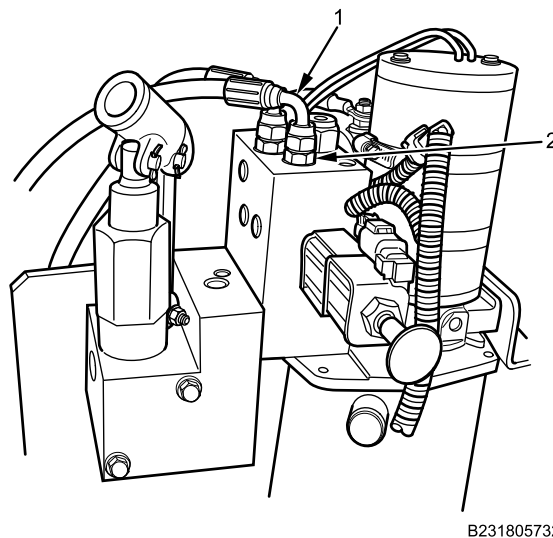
Hydraulic Power Module-to-Hydraulic Cylinder Hose Removal.
